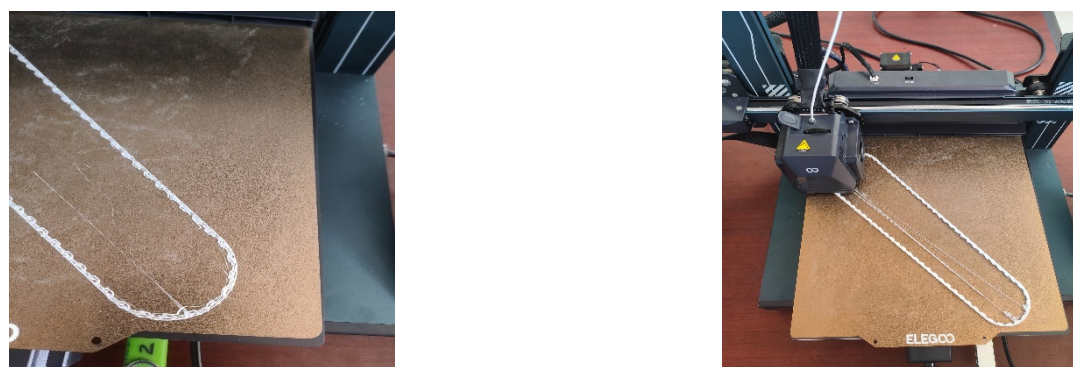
Initial layer of TPU 95A belt during FDM printing
